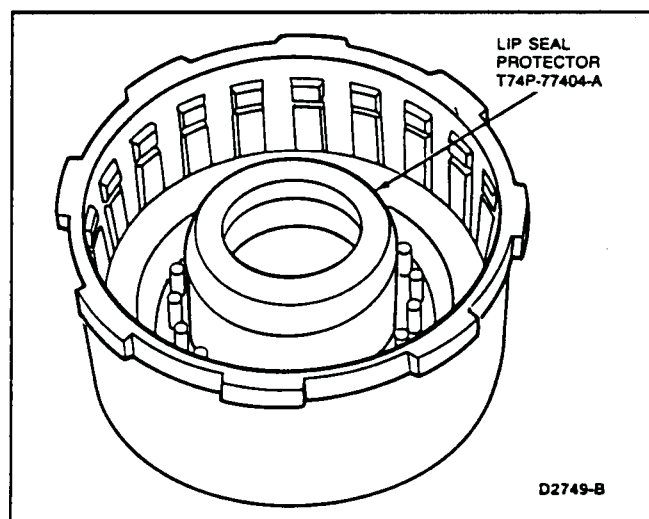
Inner Seal Protector—Reverse and High Clutch
